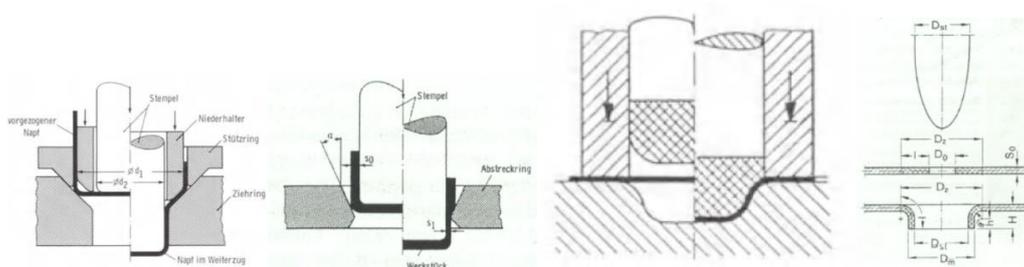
Compressive-tensile forming techniques (König & Klocke, 1990)
